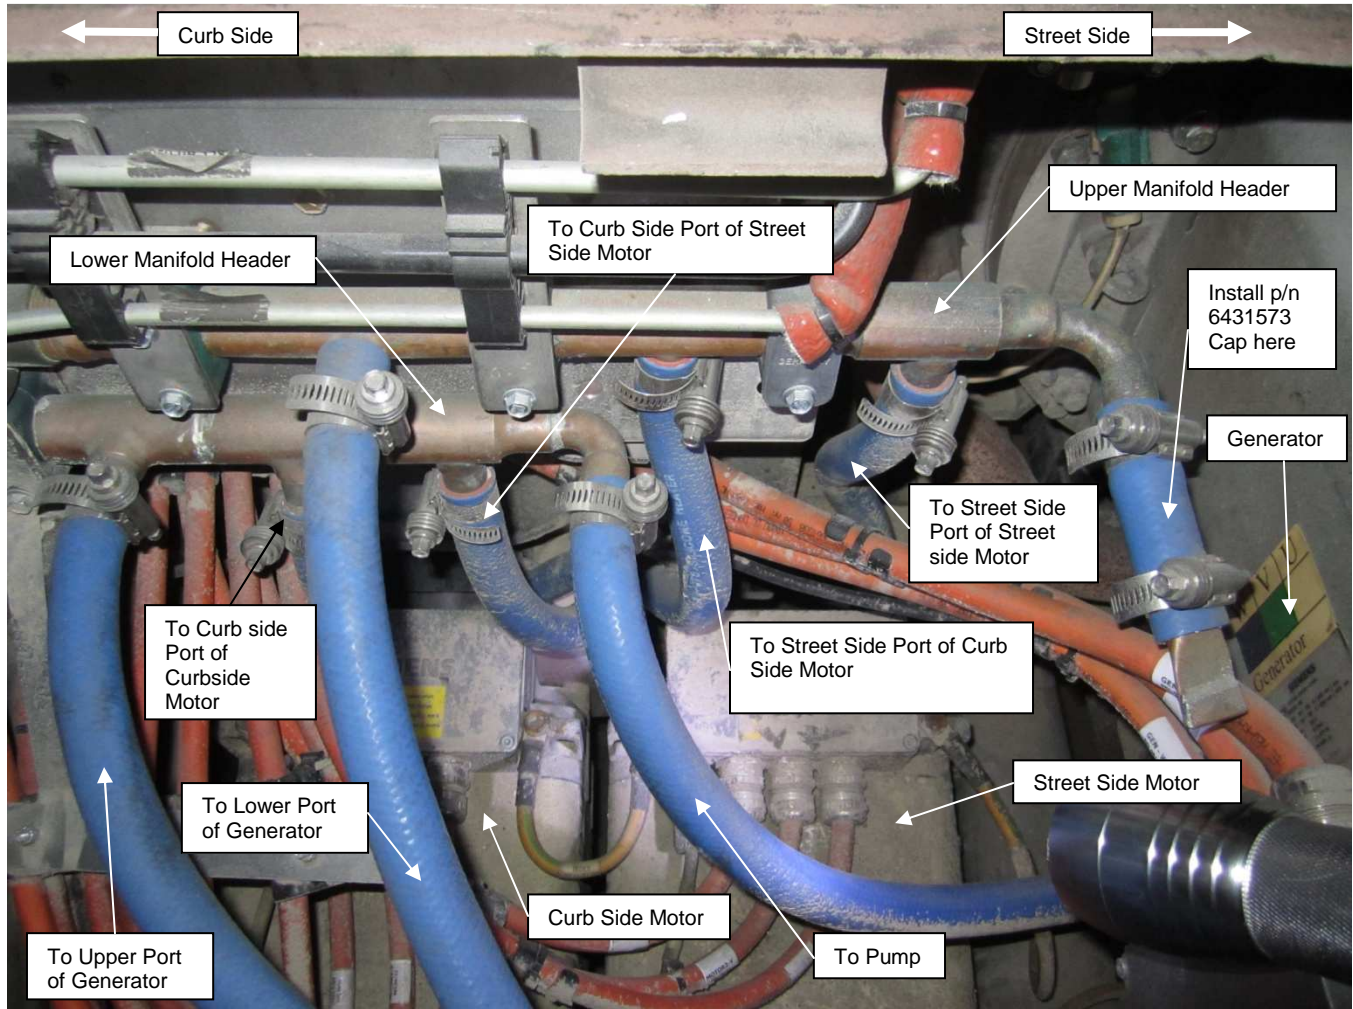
Hose Layout on Upper/Lower Manifold Headers
